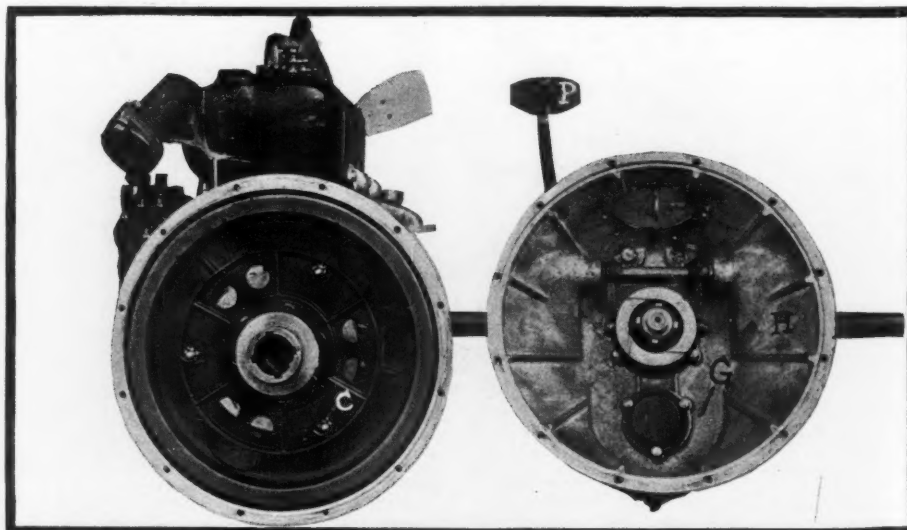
SHOWING CLUTCH C ON HAZARD MOTOR—ALSO INSIDE OF CLUTCH HOUSING H AND FRONT END G OF GEARBOX, AS WELL AS CLUTCH PEDAL P
